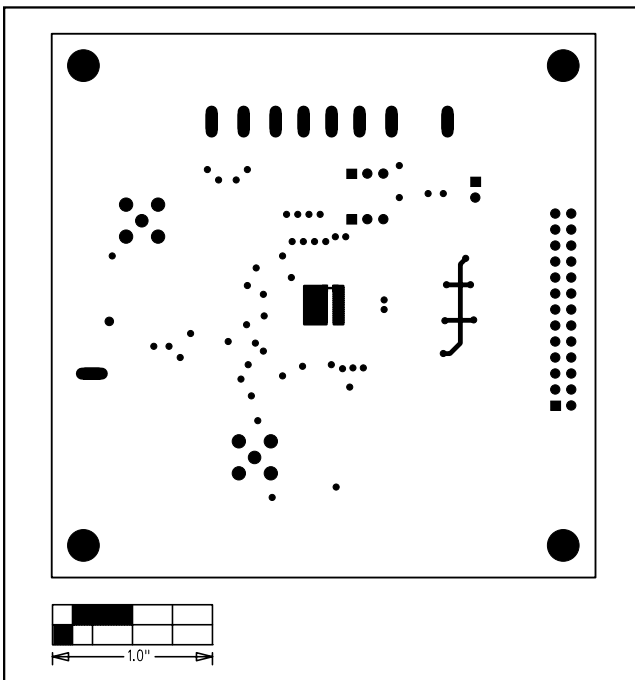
MAX1420 EV Kit PC Board Layout—Solder Side
